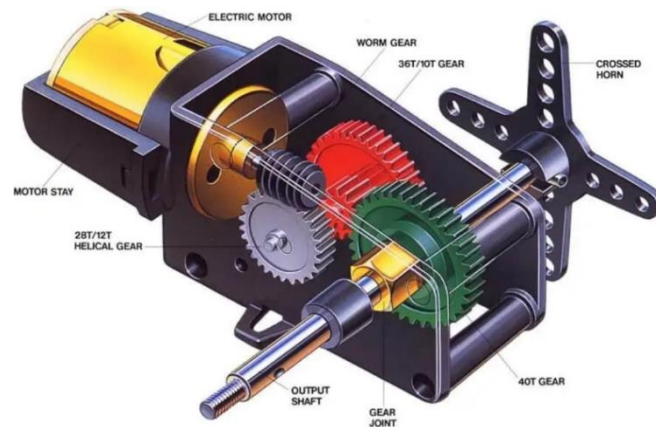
Servo motor, specifying the components, where the gears, the motor and the output parts can be seen.
